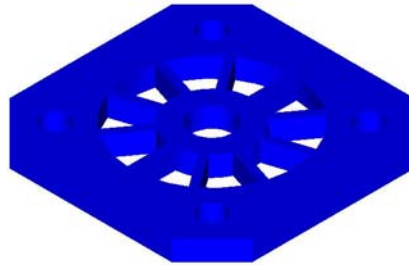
Wheel Adaptor Plate CAD Drawing
